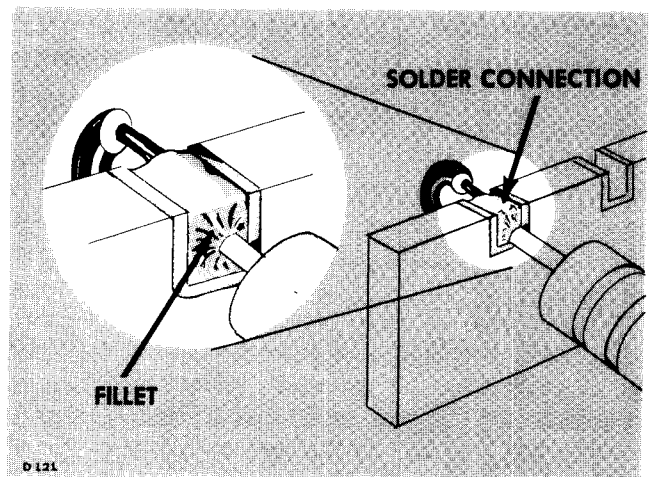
A slight fillet of solder is formed around the wire when heat is applied correctly.
